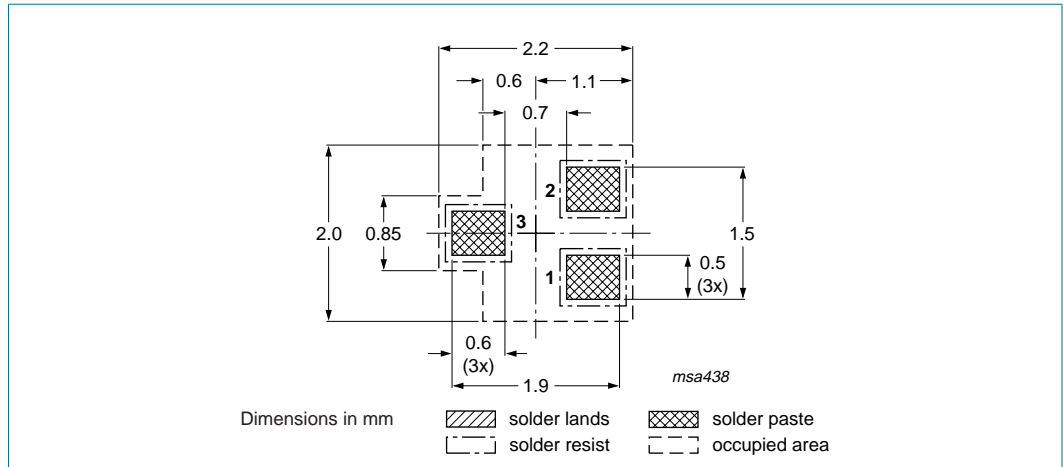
Reflow soldering footprint BAW56T (SOT416/SC-75)
